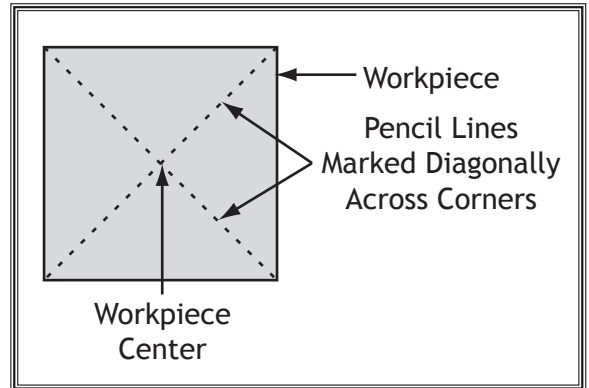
Workpiece marked diagonally from corner to corner to determine the center.
